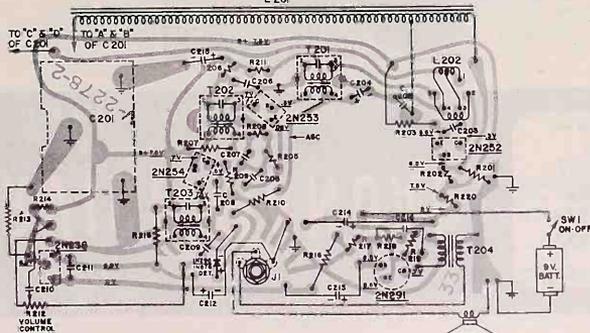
Bottom View of Printed Board Showing Top Components Symbolically
